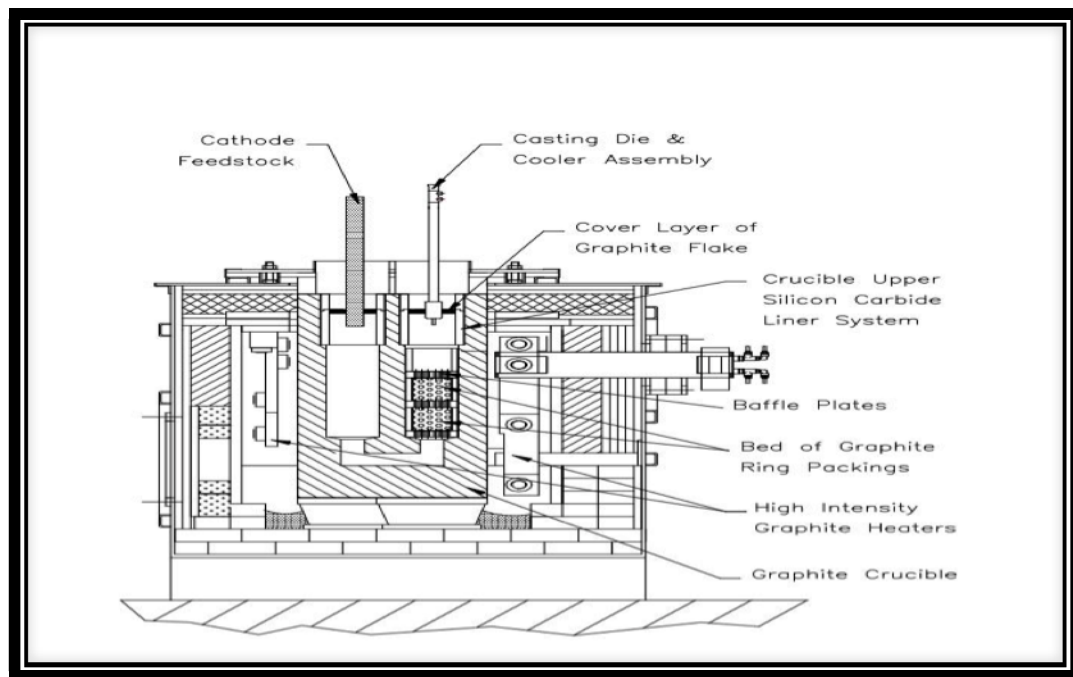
Section through Rautomead RS Upwards Vertical Continuous Casting Furnace
